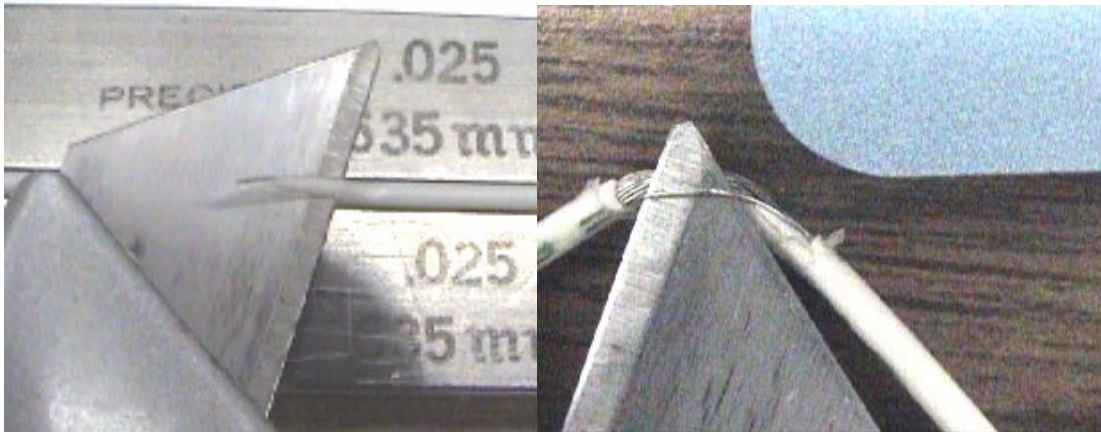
, Two Steps Required for a Partial Conductor Strand Cut.
